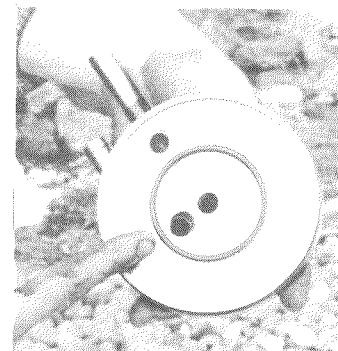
The underside of the engine blanking plate and oil feed take-off comes complete with a central 'O' Ring seal. Ensure it's slotted home properly.
